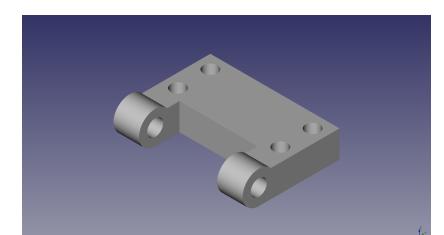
Begonia 3D Printed Spool Hinge Render
